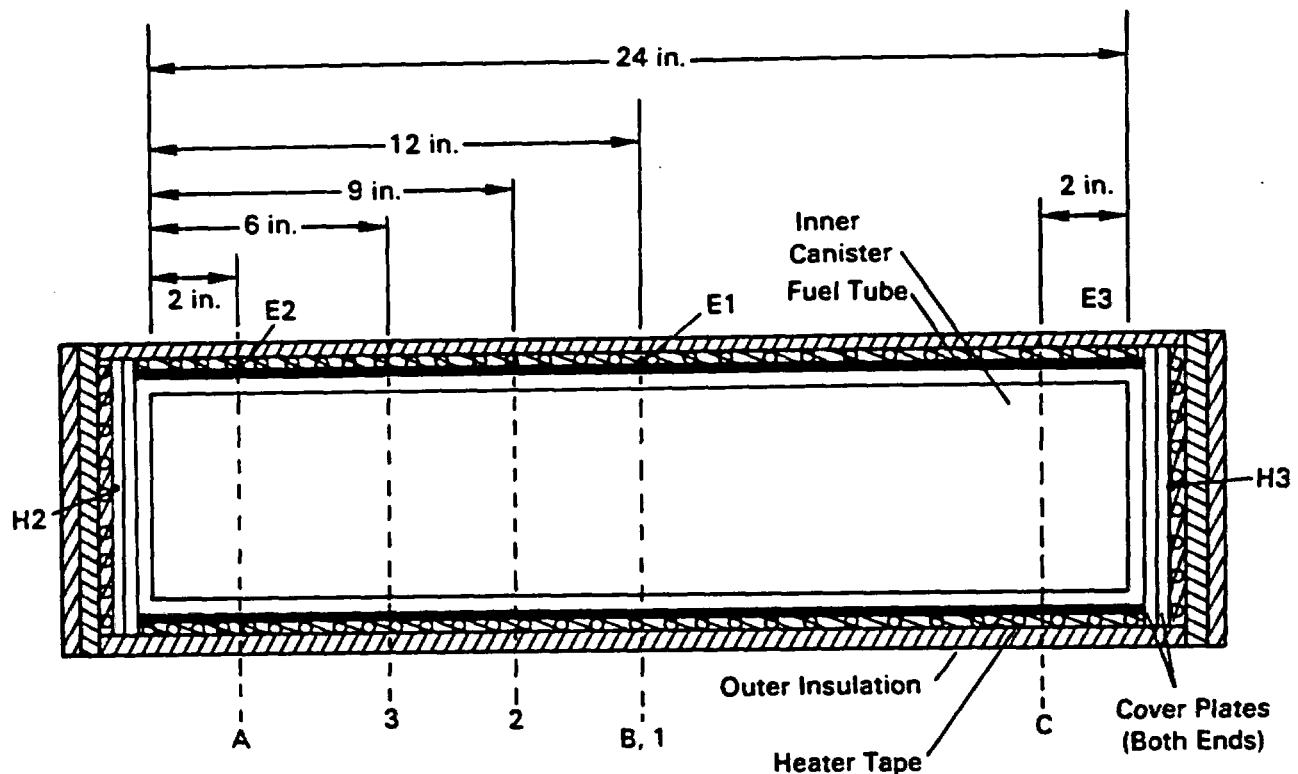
Unconsolidated Assembly Test Section
